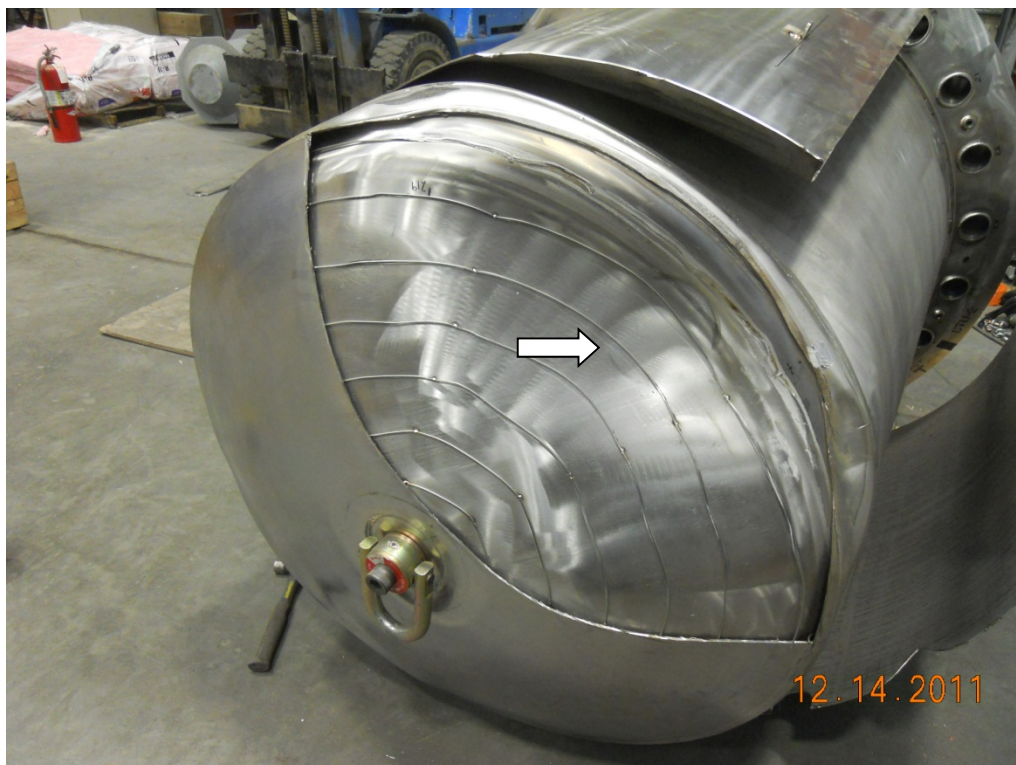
View of Damage Due to Test Series D3, Head Shield Cut Away (arrow indicates puncture bar impact location)
